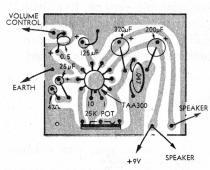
Wiring pattern and component layout of the audio board, as seen from the component side.
